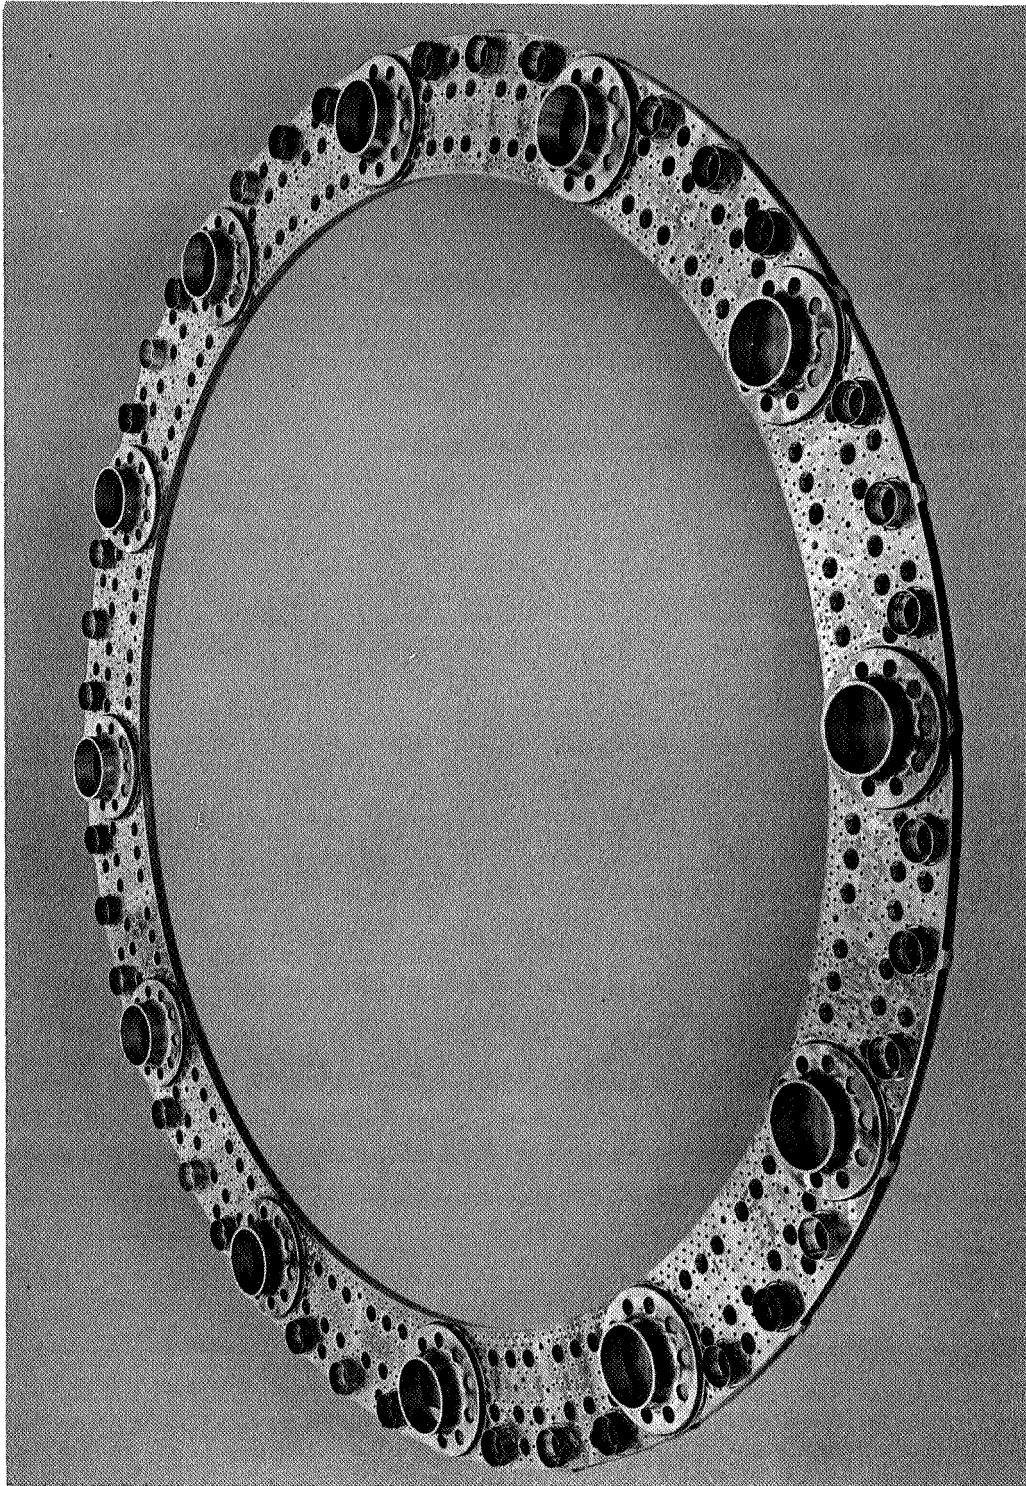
NOZZLE END SUPPORT RING ASSEMBLY
